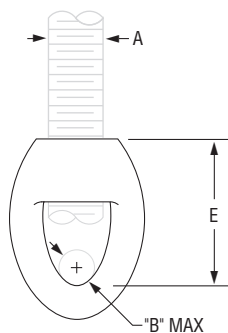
R: Loads (lbs) • Weights (lbs) • Dimensions (in)
